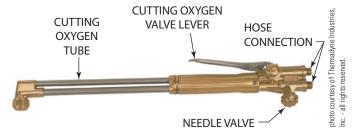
Dedicated oxyfuel cutting torch.
